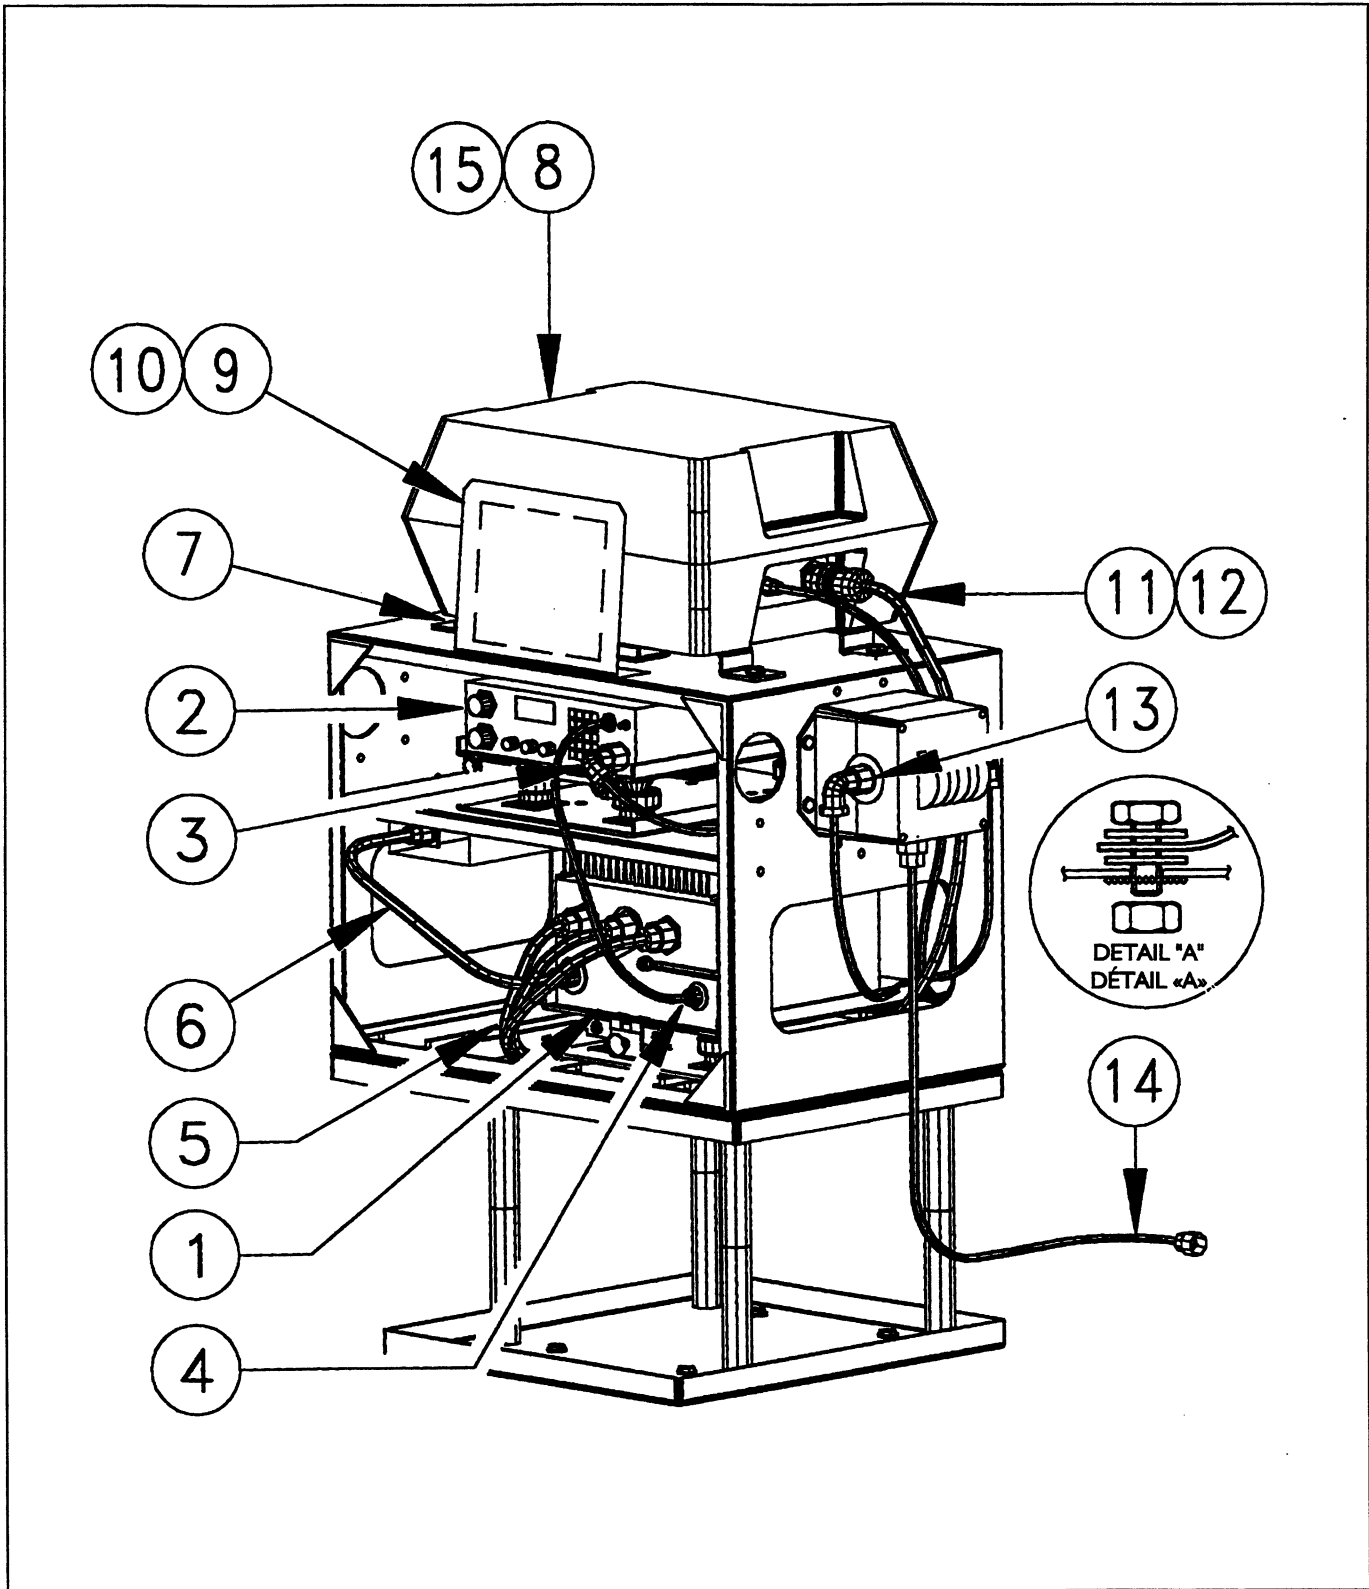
(Sheet 1 of 4) Radio Equipment Installation and Cabling
